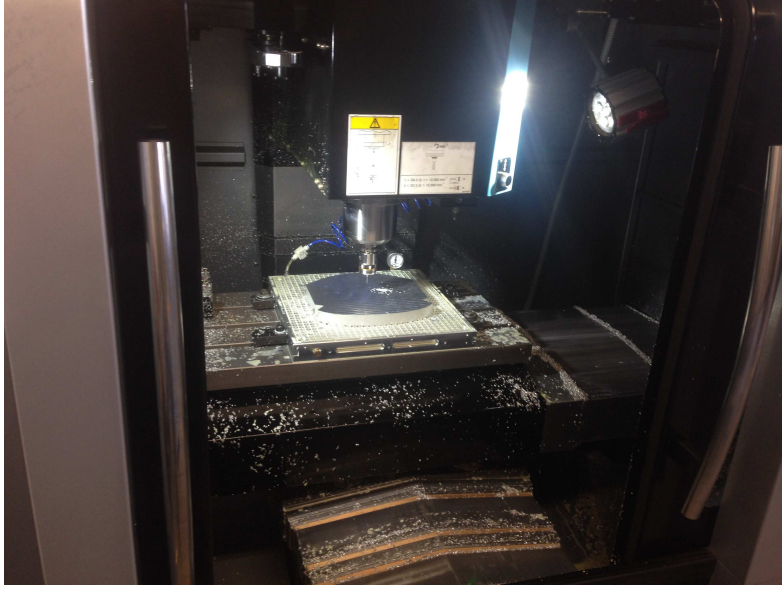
Manufacturing of the prototype inside the milling machine (IETR).
